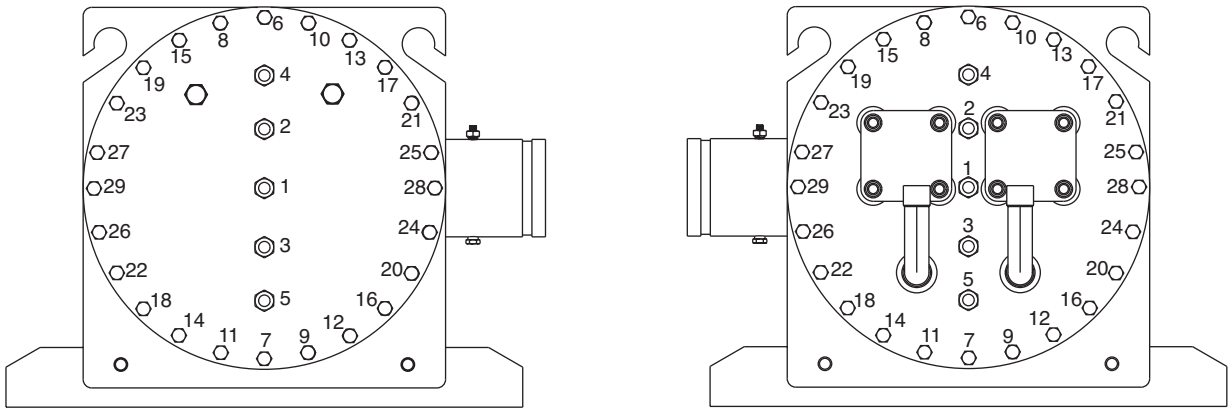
Bolt Tightening Sequence, 30RB080-100
